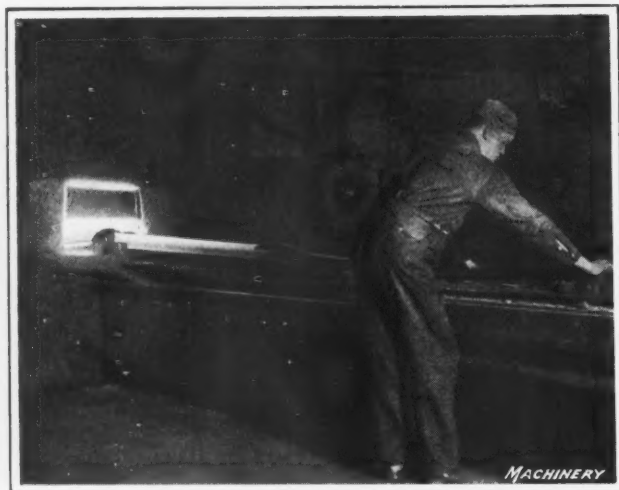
Drawing and welding Skelp into Butt-welded Pipe
